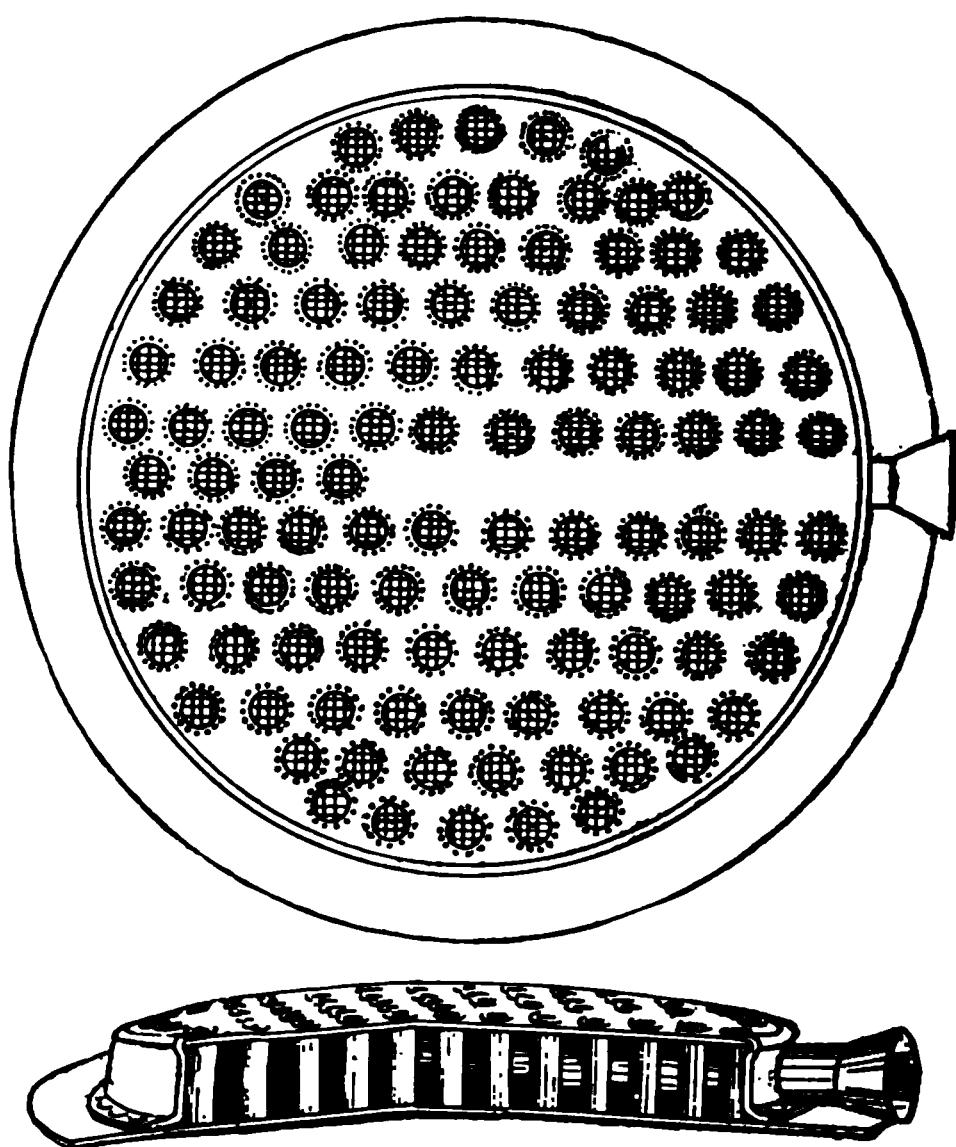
Plan and Part Section of a Typical Gasoline Burner for Steam Carriage Use.
